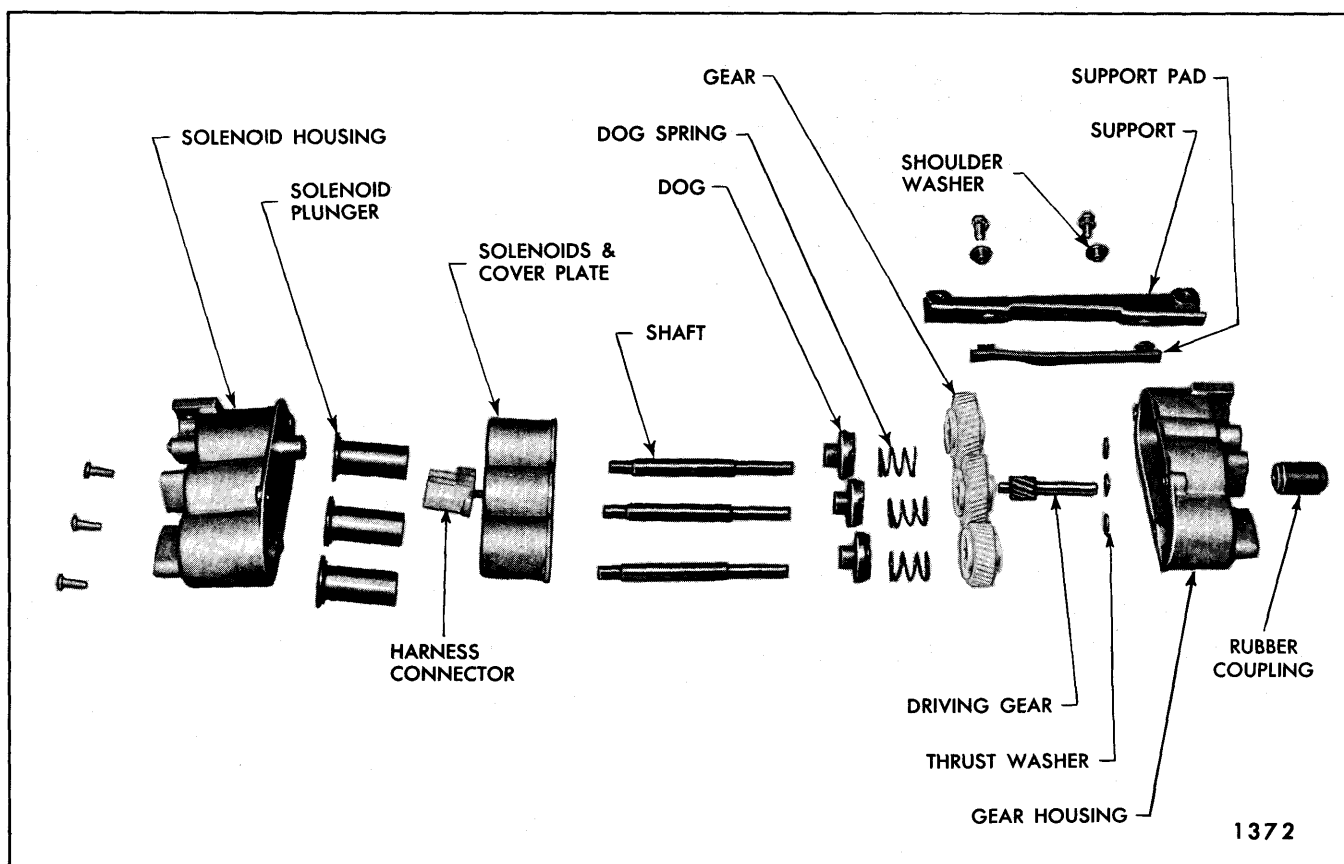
Six-Way Seat Adjuster Transmission - "B & C" Styles
